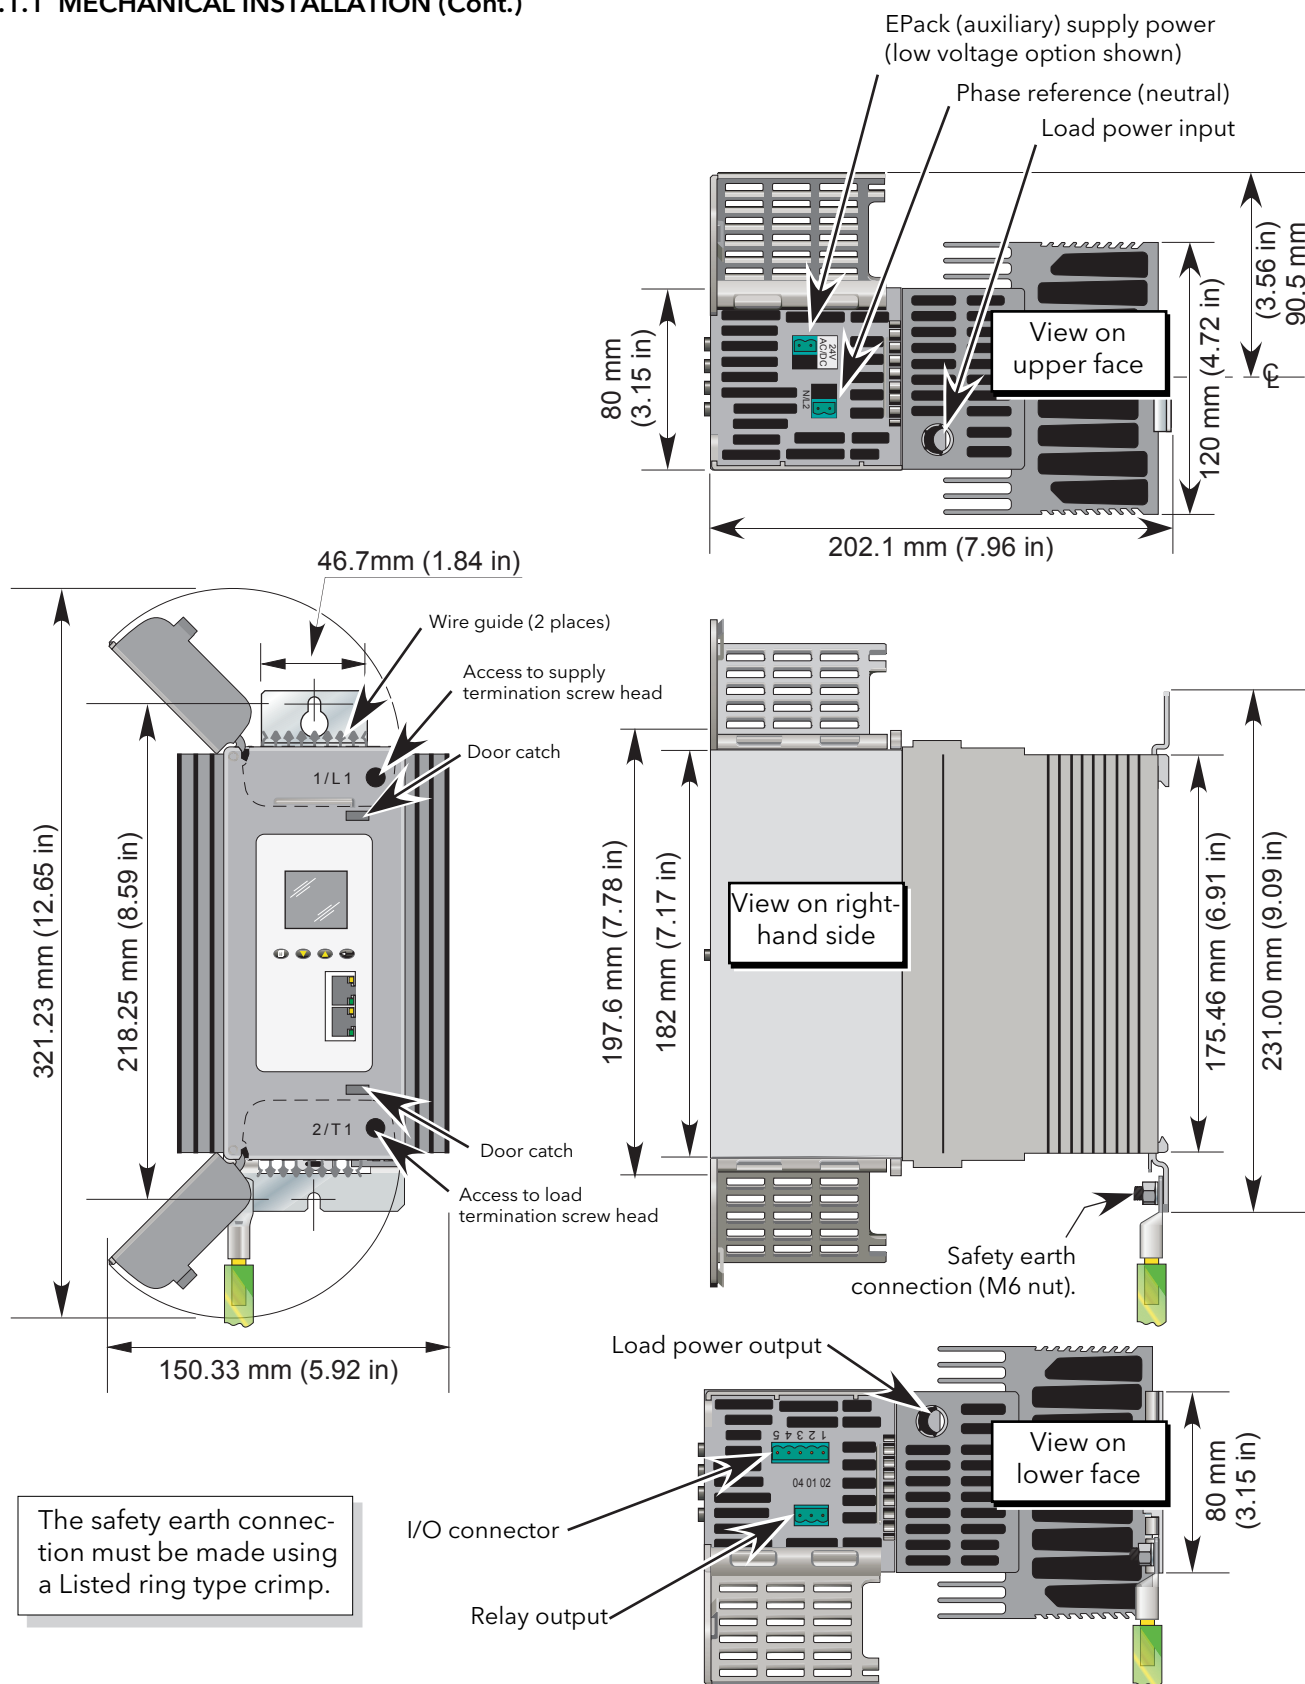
Mechanical installation details (125A units) (Doors open).
